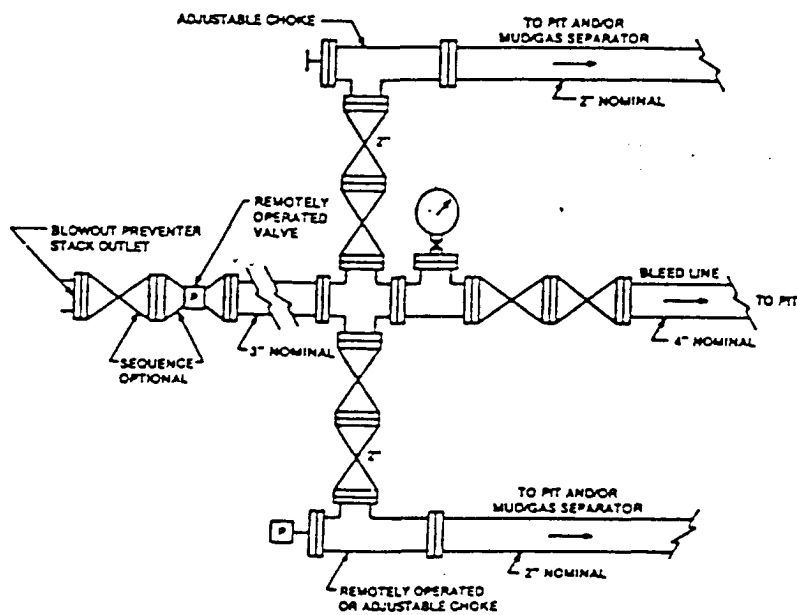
Typical choke manifold assembly for 5M rated working pressure service — surface installation.
